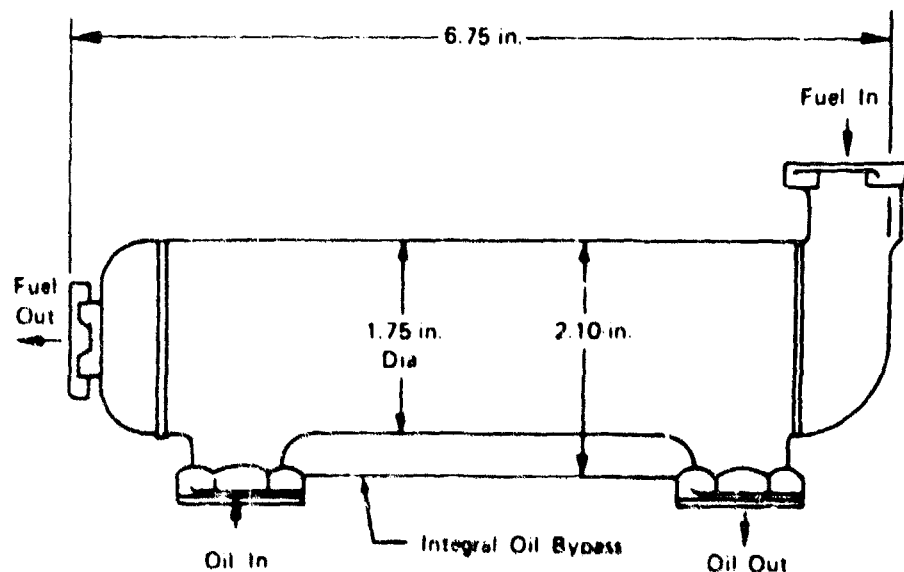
STJ346A Auxiliary Fuel/Oil Cooler
